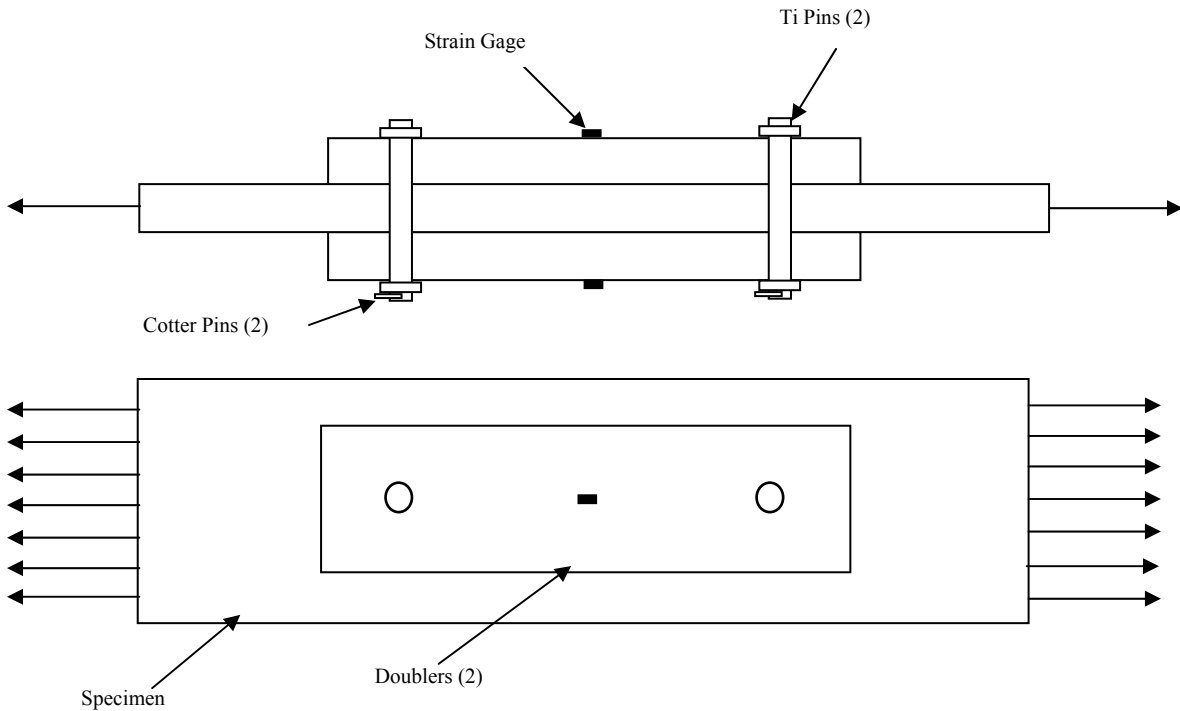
Test Specimen Assembly – Small Crack Growth Test
